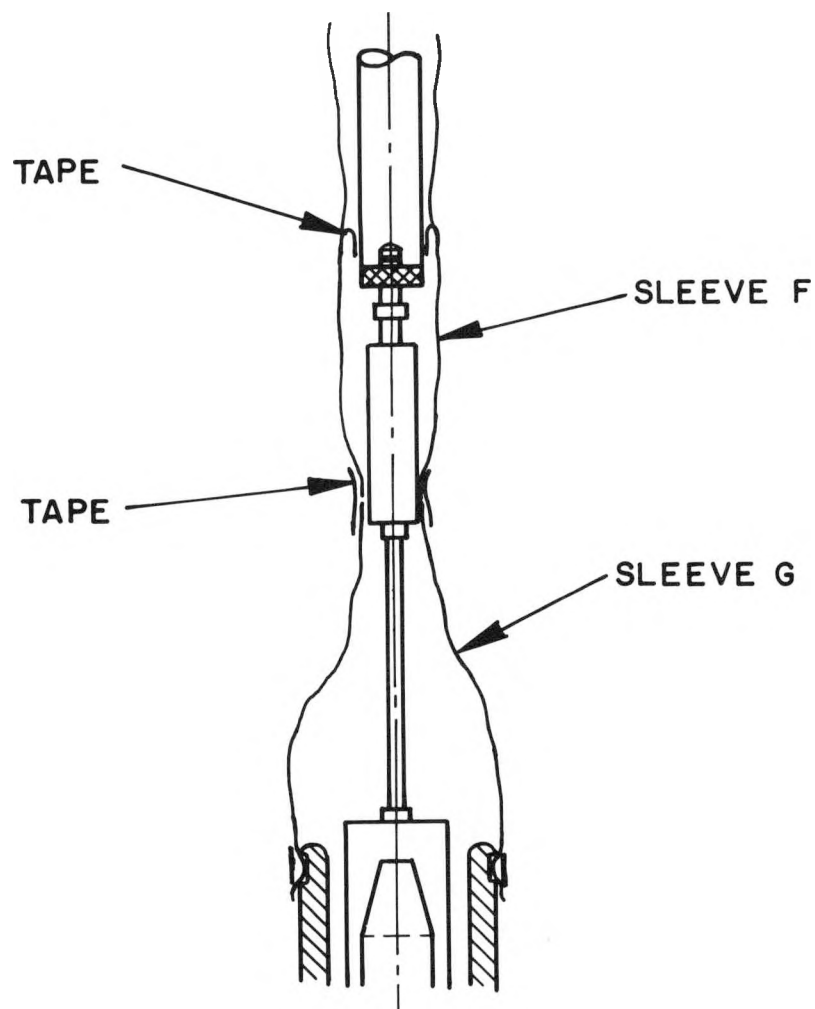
Auxiliary Sleeves F and G for Translating Assembly Removal
